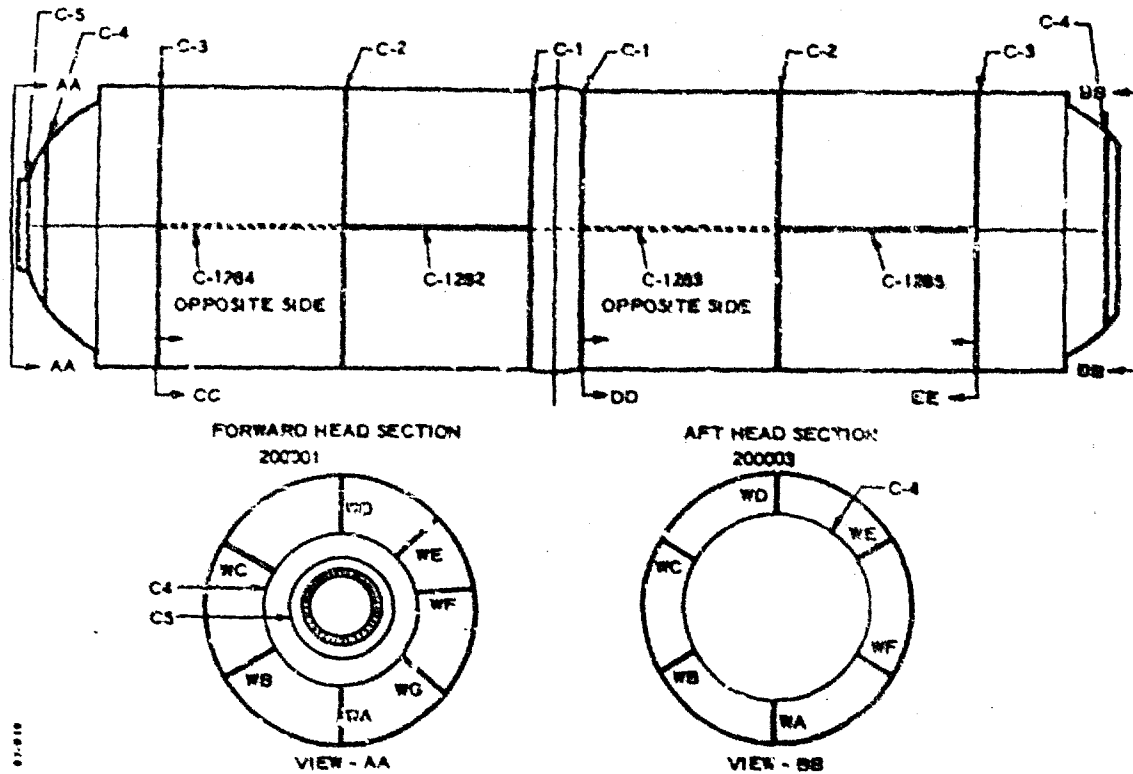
156-Inch Diameter Hydroburst Weld Identification
